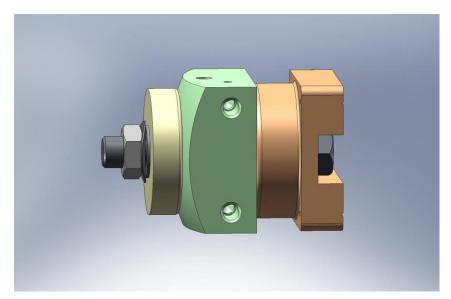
Assembled spherical mount. Roughly align Base to Mount, so sides are parallel to one another. Tighten jam nut until assembly is rigid.
